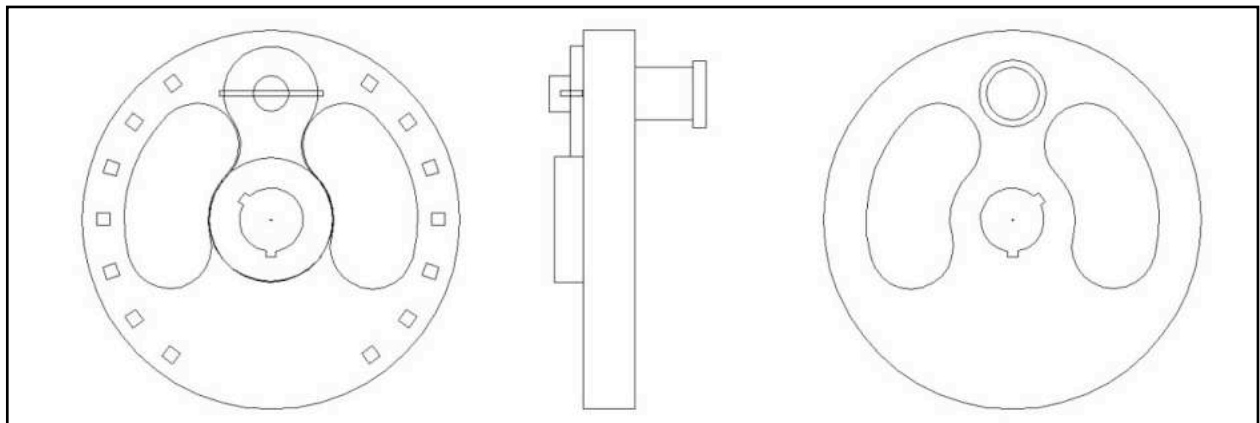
Flywheel (left to right) rear, side, and front views.
